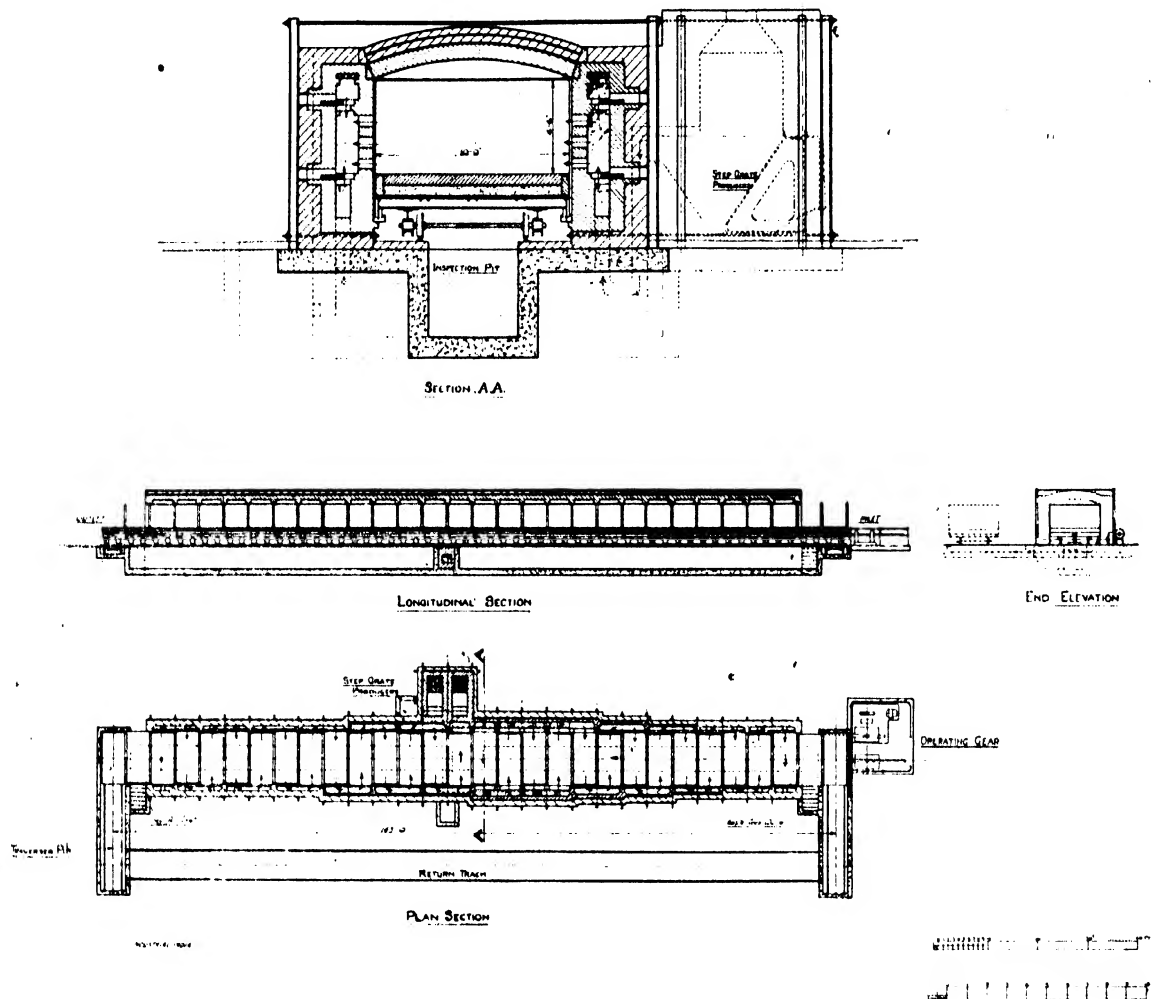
Arrangement of W.D. Tunnel Chamber Kiln
